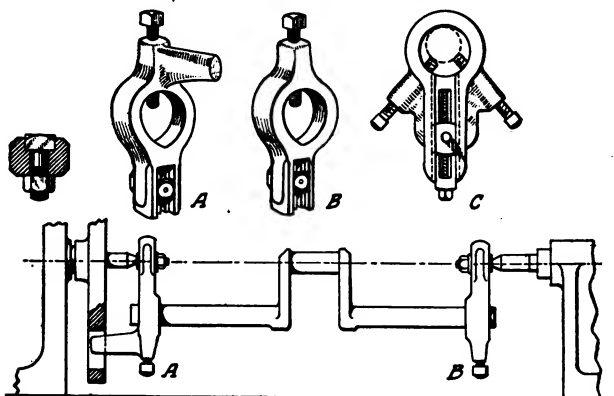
Dogs with Adjustable Centers for Handling Crankshafts
